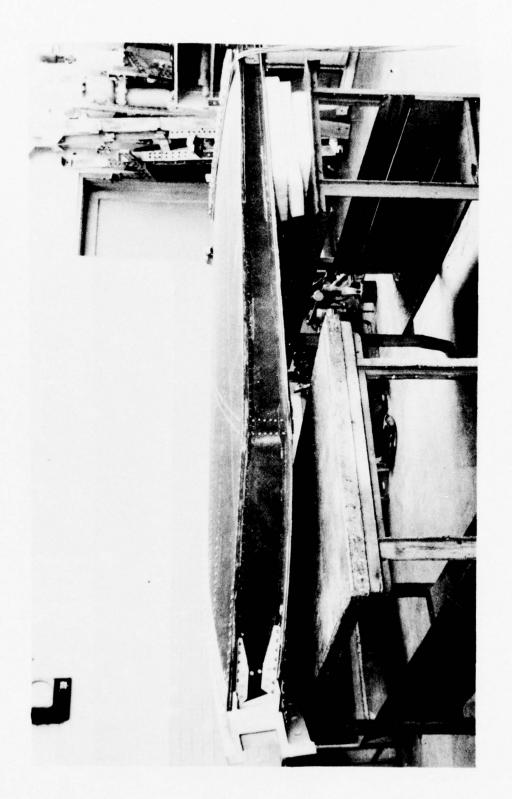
COMPOSITE WING BOX ASSEMBLY - FRONT VIEW
